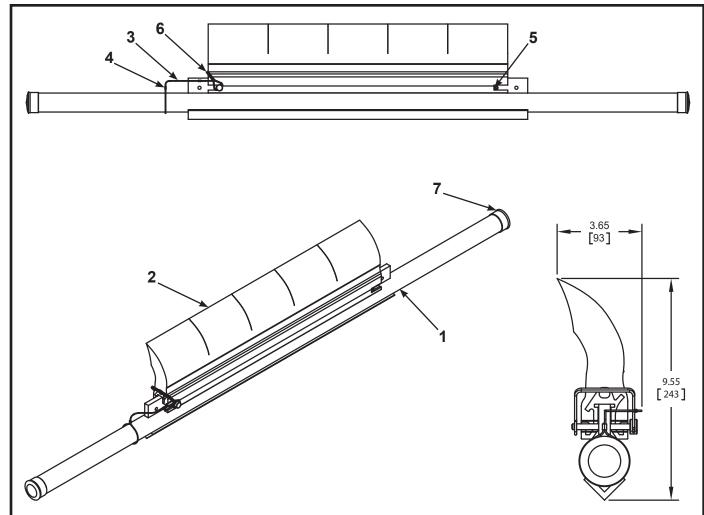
Martin<sup>®</sup> QC1+<sup>TM</sup> Cleaner HD with One-Piece Mainframe Assembly, P/N C1QCH1SXXSXXXXX
